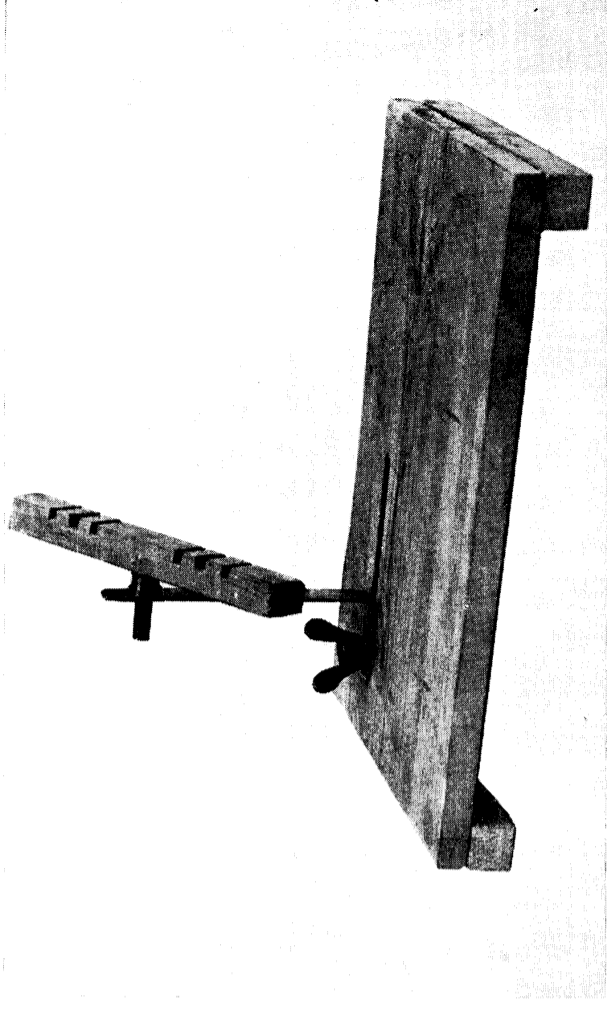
Details of base and tail stock. The support is made of strip brass, adjustable in a slot and held by bolt and flynut
